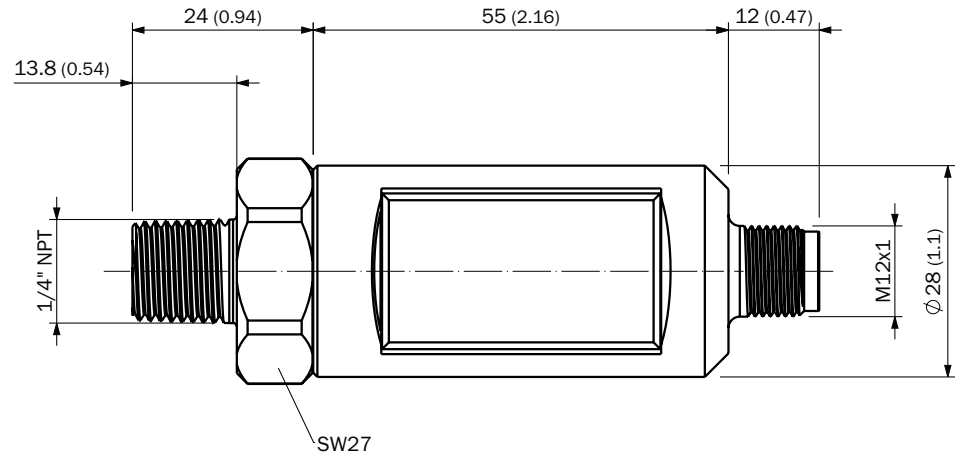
Dimensioned drawing for PBST-xxxxxxN1xxxxxxx
